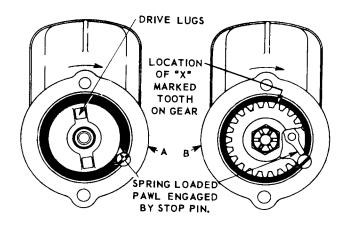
DRIVE GEAR TIMING MARK ASSEMBLY
